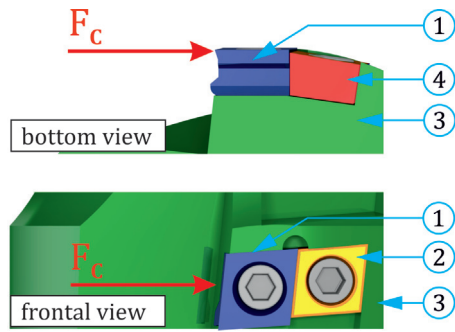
Sensor system. Indexable insert (1), piezoceramic thick film on sensor plate (2), tangential milling tool (3), sensor plate (4).
